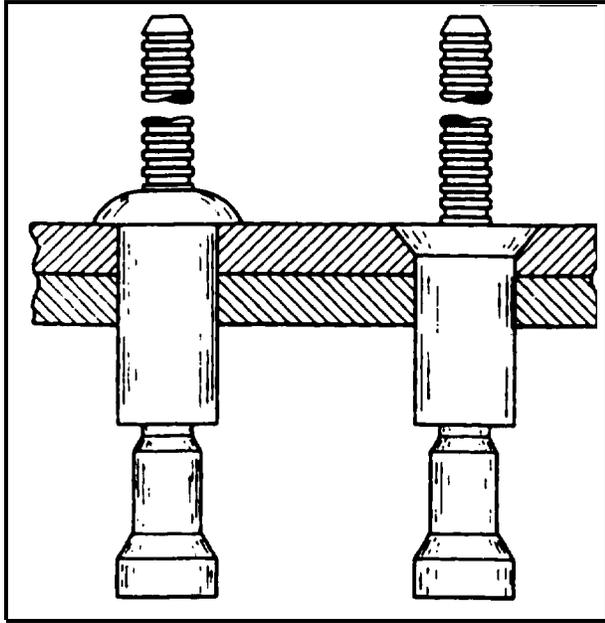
Self plugging friction-lock Cherry rivets.
